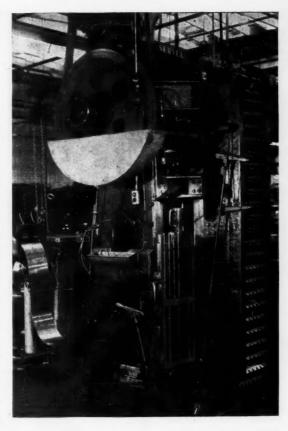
Condenser fin assembly machine, designed by W. L. O'Brien and built upon a standard punch press.
